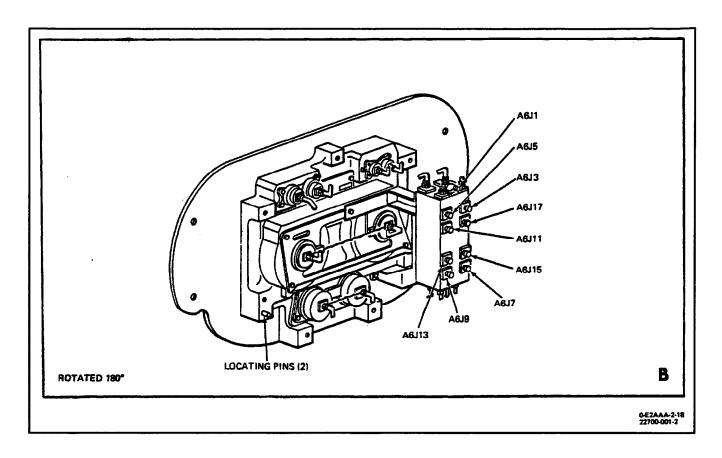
Removal and Installation of Antenna Assembly AS-2881/ALR-59 (Sheet 2)
